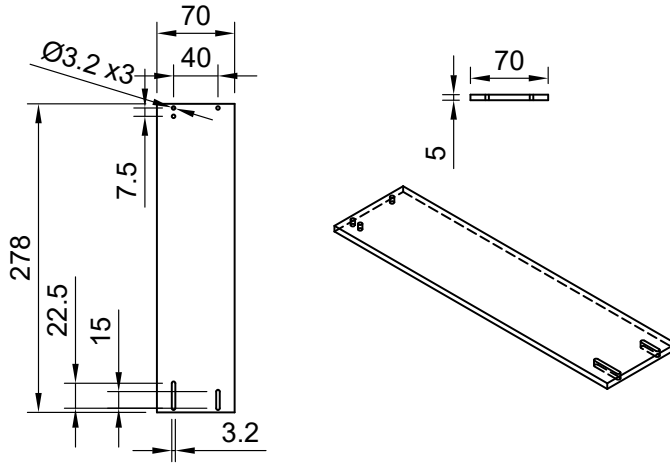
Technical drawing and dimensions of baseplate on which the mechanism is mounted
